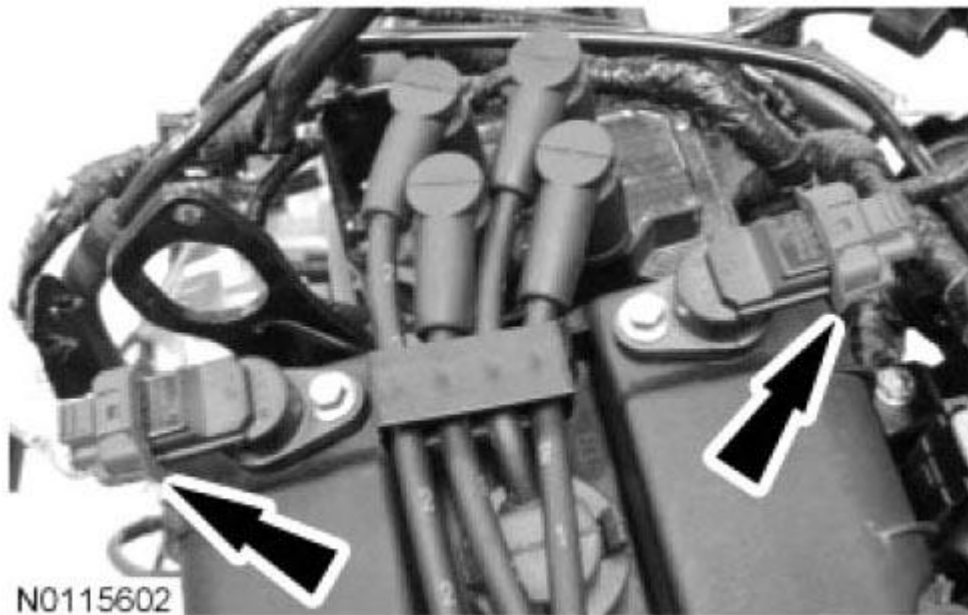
Locating Camshaft Position (CMP) Sensor Electrical Connectors
